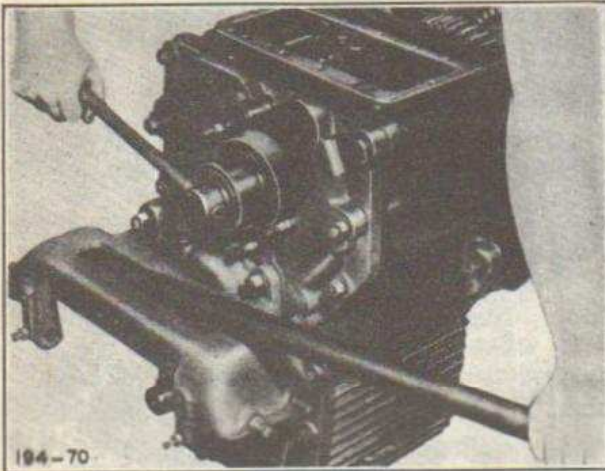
Removing Mainshaft Rear Bearing Lock Nut
